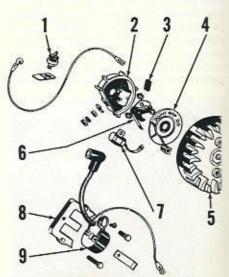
Exploded view of magneto used on models 340, 945, 1630, 1631, 1644 and 1645. Ignition timing is fixed.
